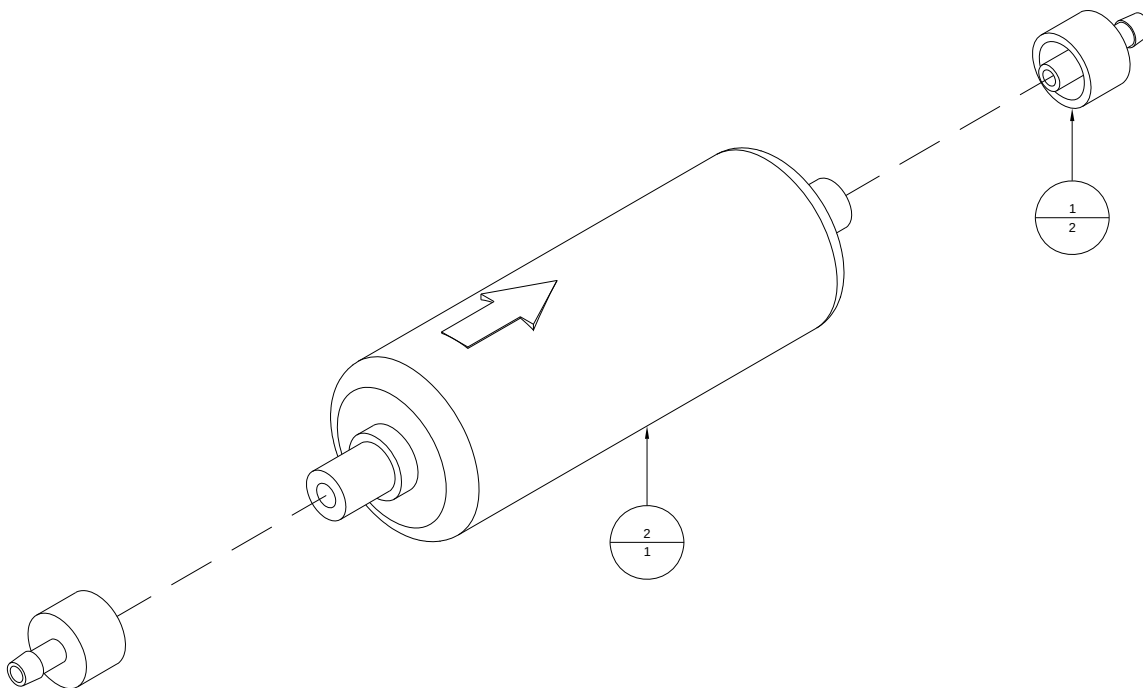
9103390A – Filter, Assembly, 10 μm
